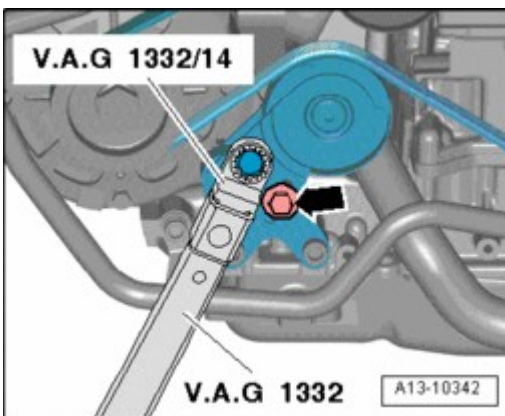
Positioning Torque Wrench With Socket AF 16 mm V.A.G 1332/14 On Tensioning Roller Hex Head And Tension Ribbed Belt To 70 Nm
